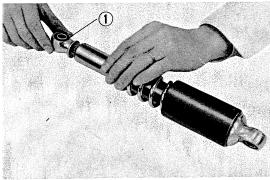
Rear shock absorber disassembly 1 Bottom metal
